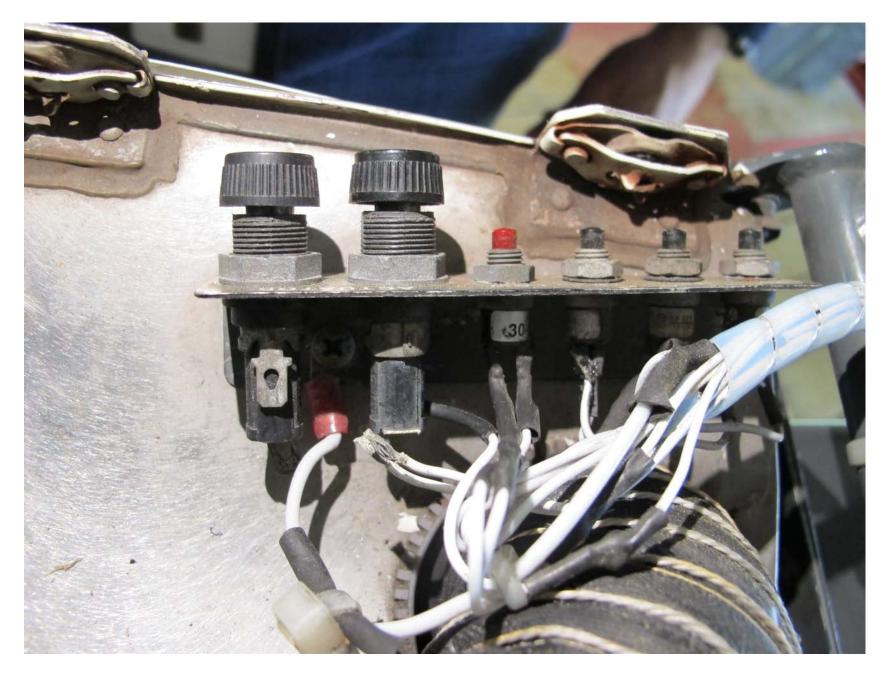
View of terminal condition with wire tie and tape removed (RH Photo)
